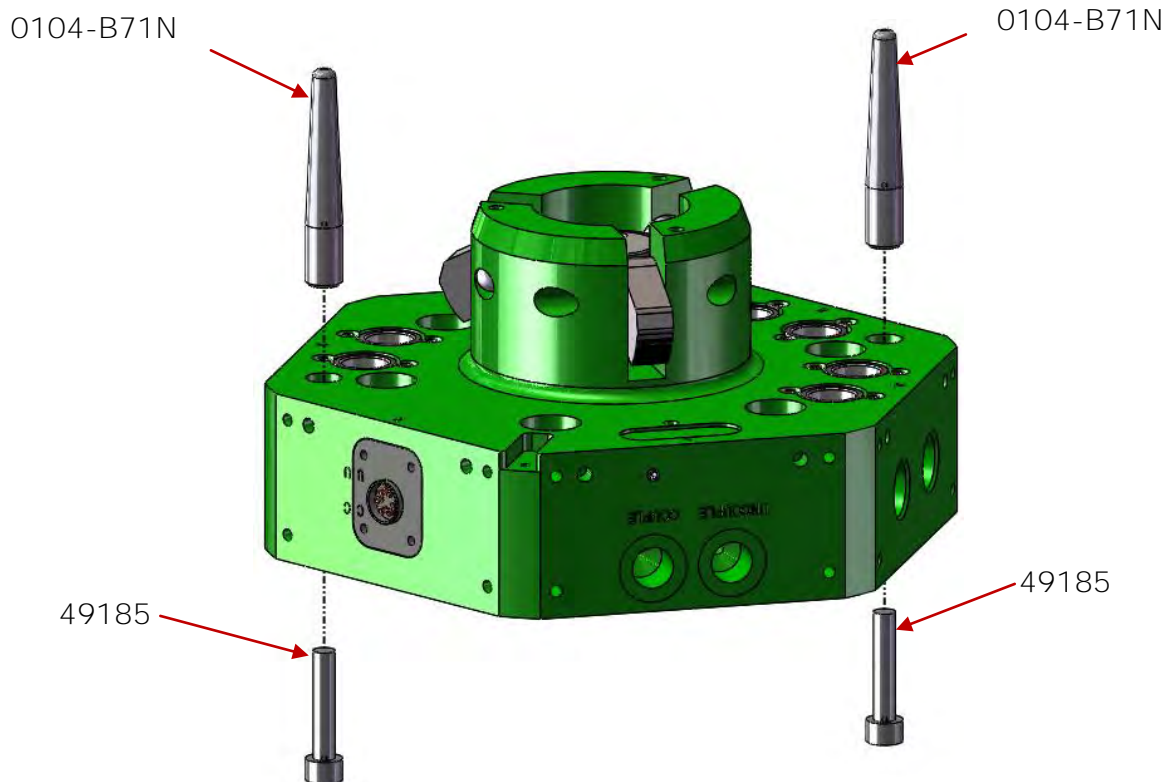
Locating/Alignment Pin Replacement
